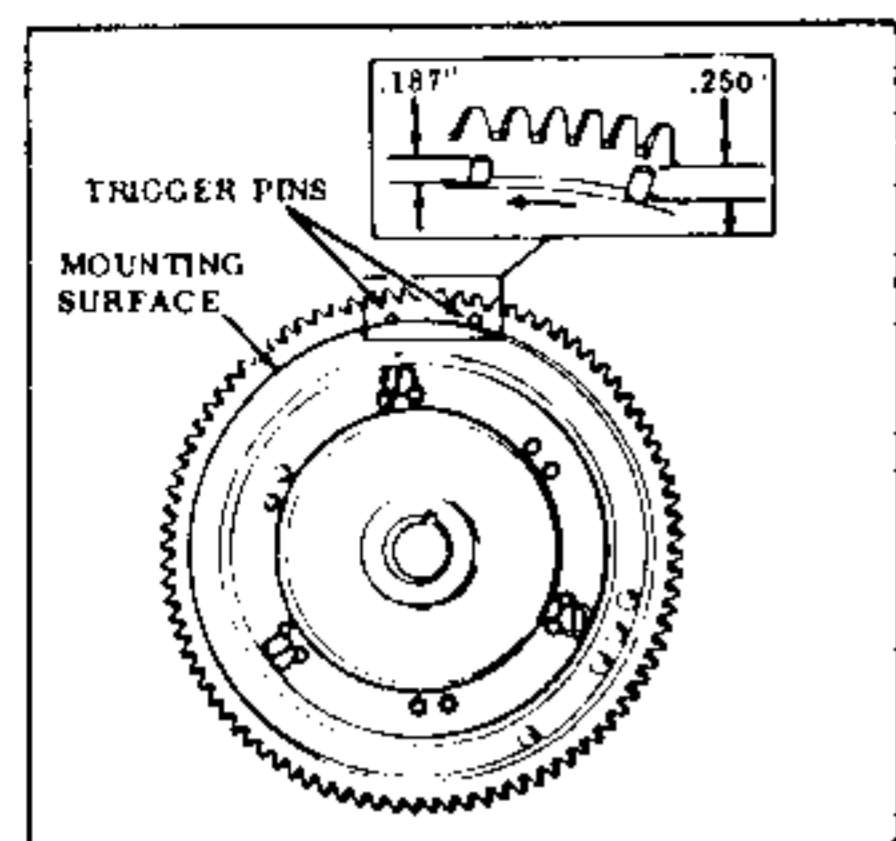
Remove flywheel and drive trigger pins in or out as necessary until long pin is extended 0.250 (6.35 mm) inch and short pin is extended 0.187 inch (4.75 mm) above mounting surface.
